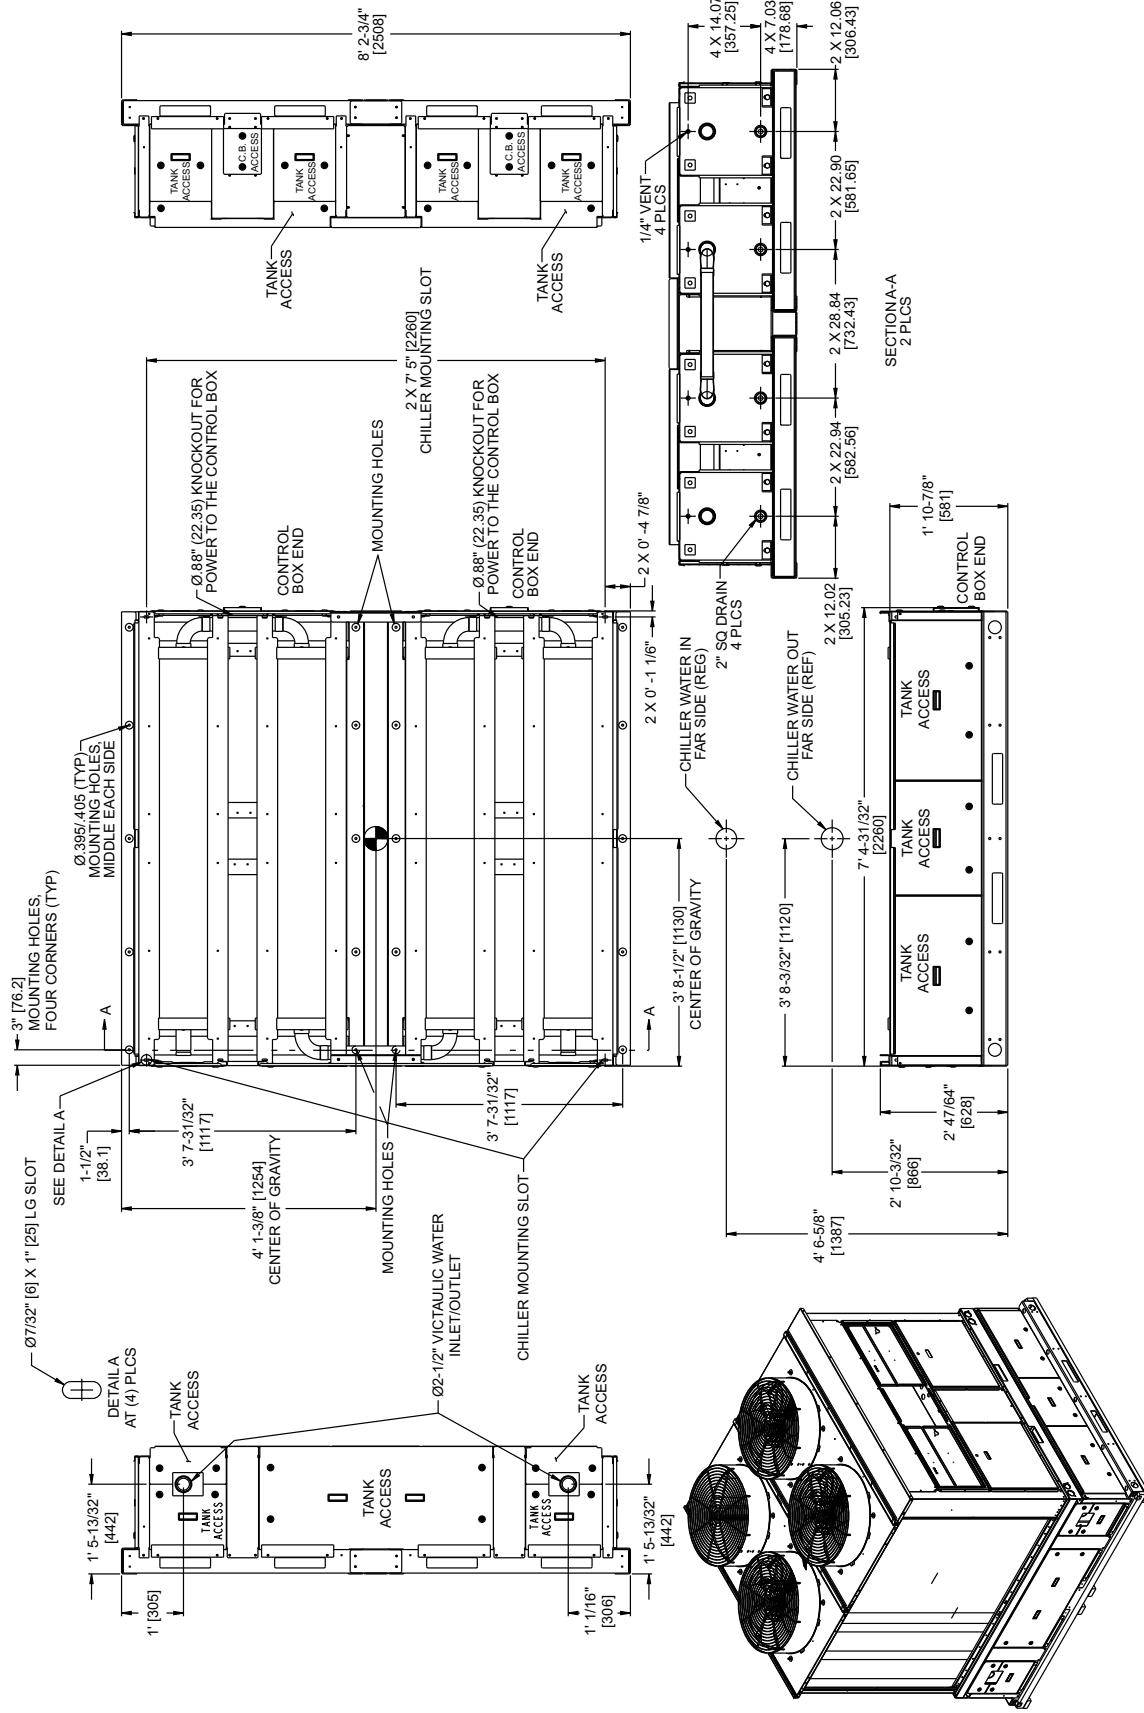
Accessory Storage Tank 30RA-900-052 Dimensions — 30RAP035-060 Units
